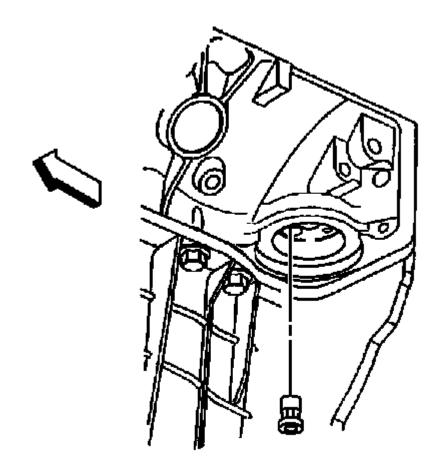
View Of Oil Filter Bypass Valve Courtesy of GENERAL MOTORS CORP.
